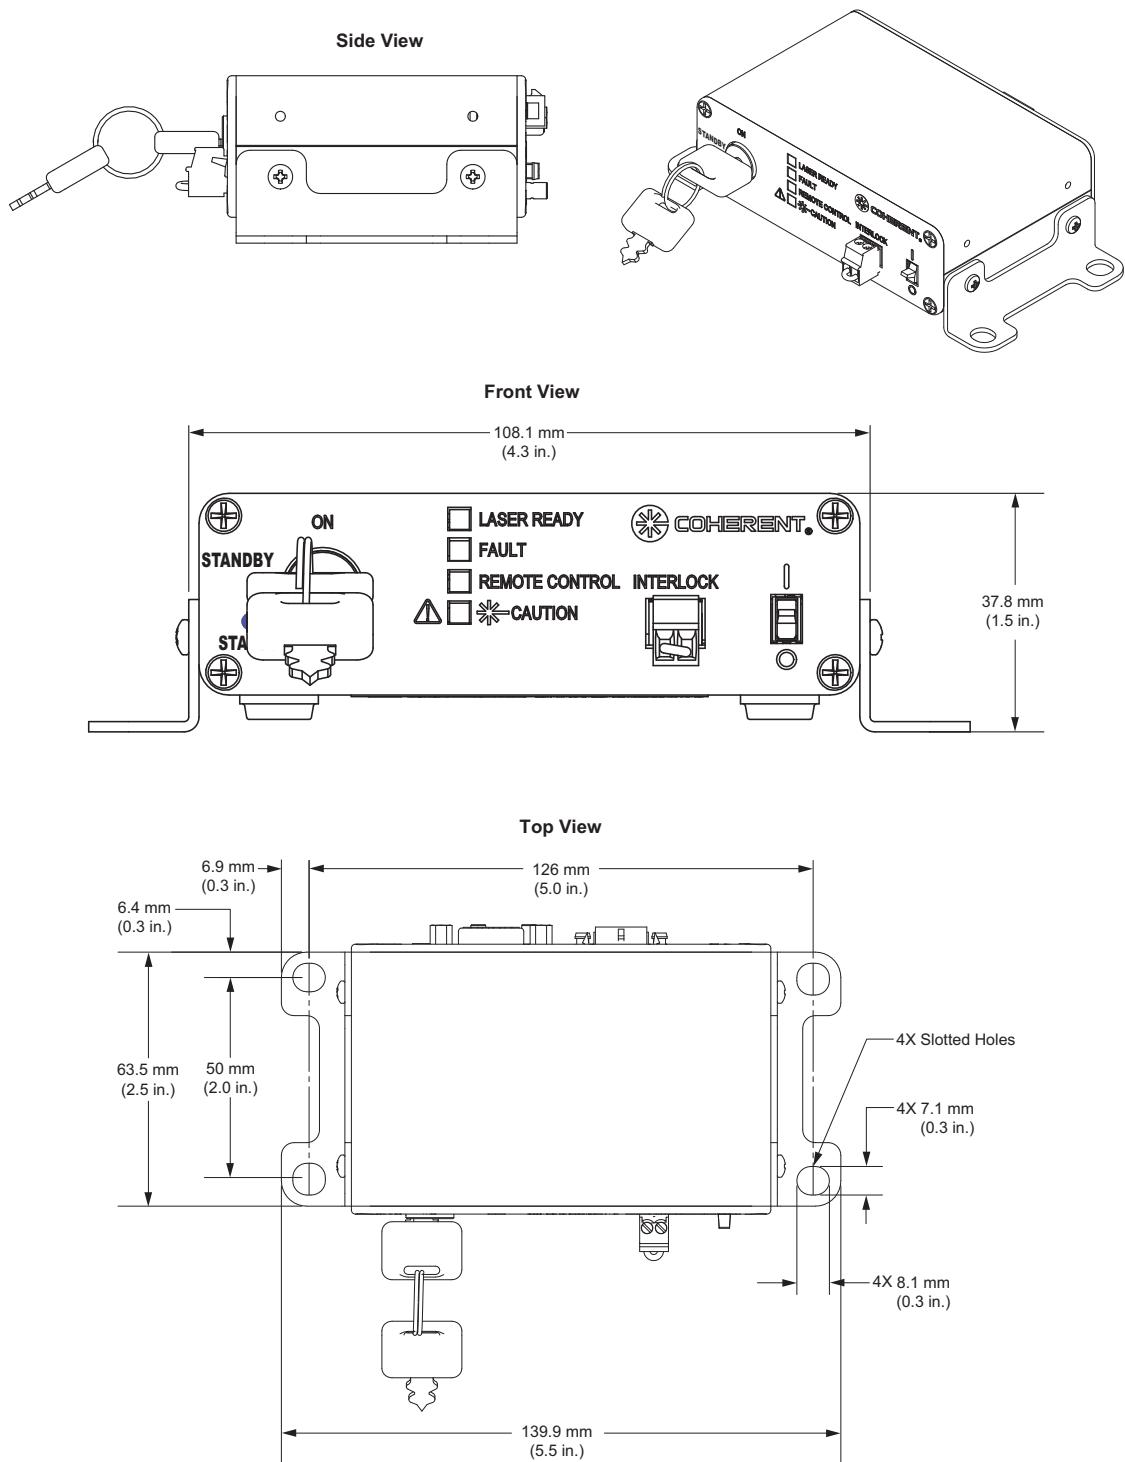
OBIS Remote (with Mounting Brackets) Dimensions
